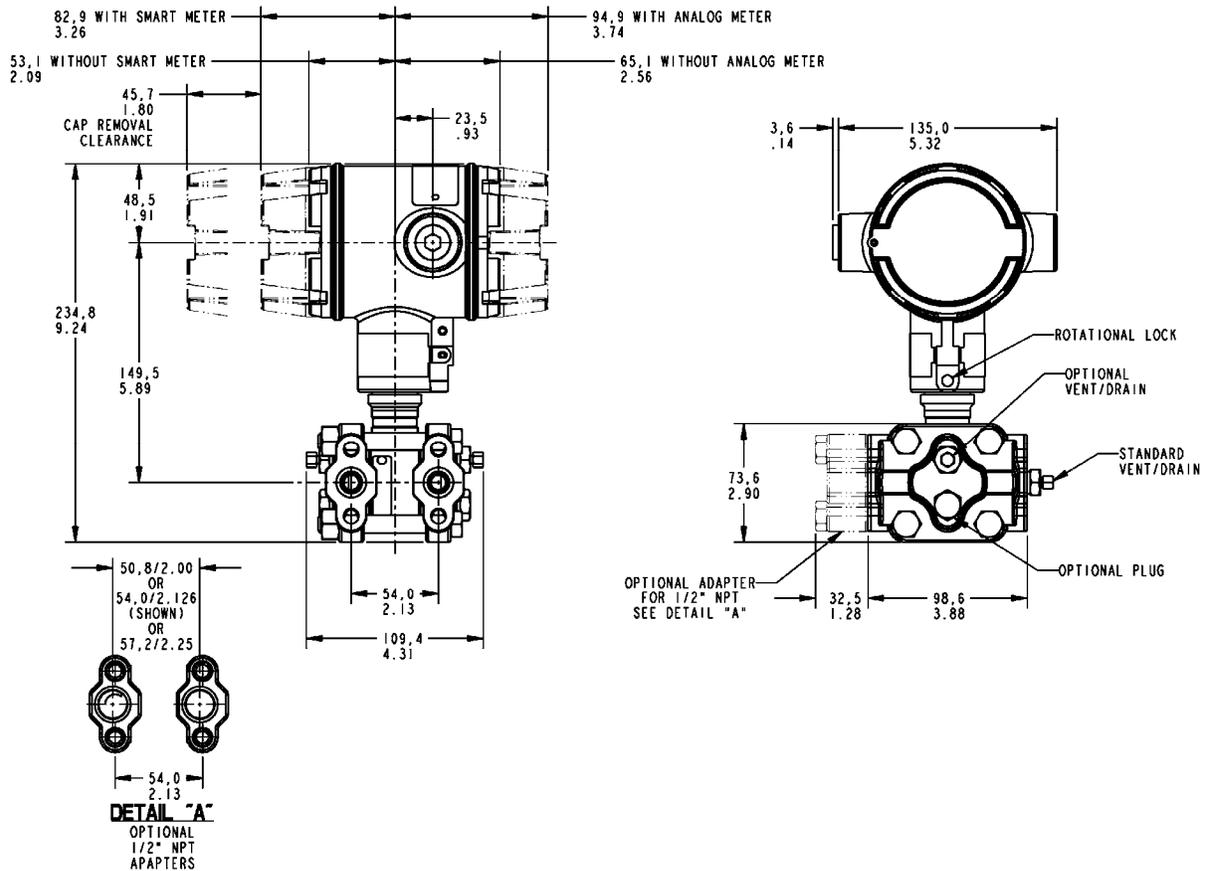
Typical mounting dimensions of STD110, STD120, STD125, STD130 & STD170 for reference
